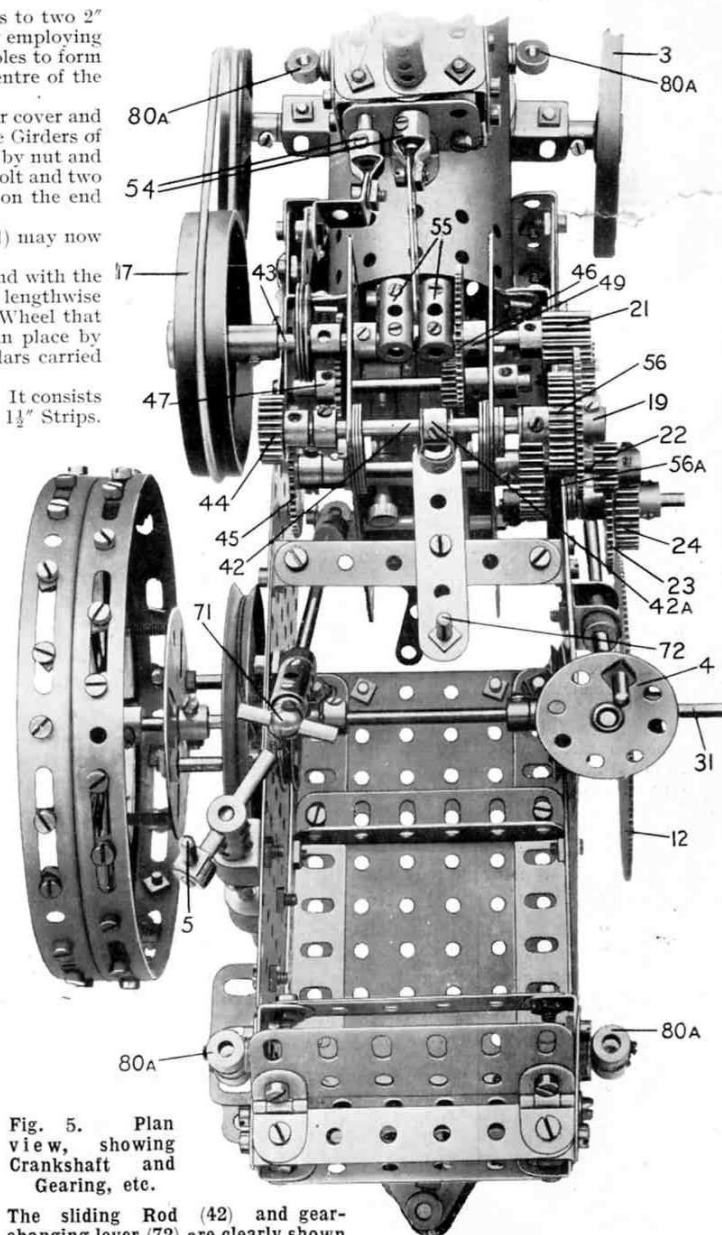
Plan view, showing Crankshaft and Gearing, etc.
